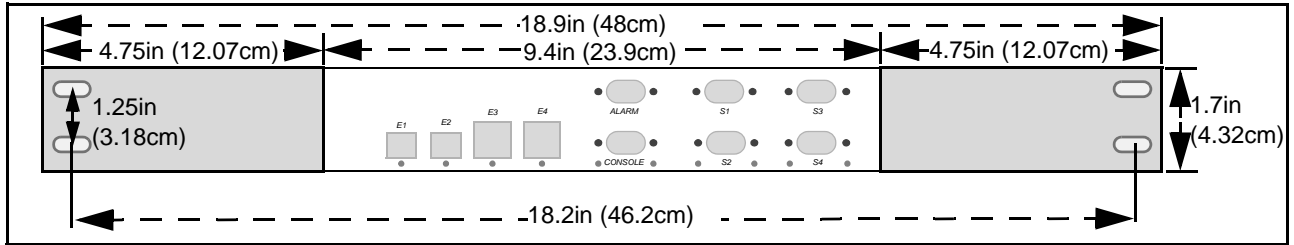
19" Rail Mounting - Dimensional Drawing
